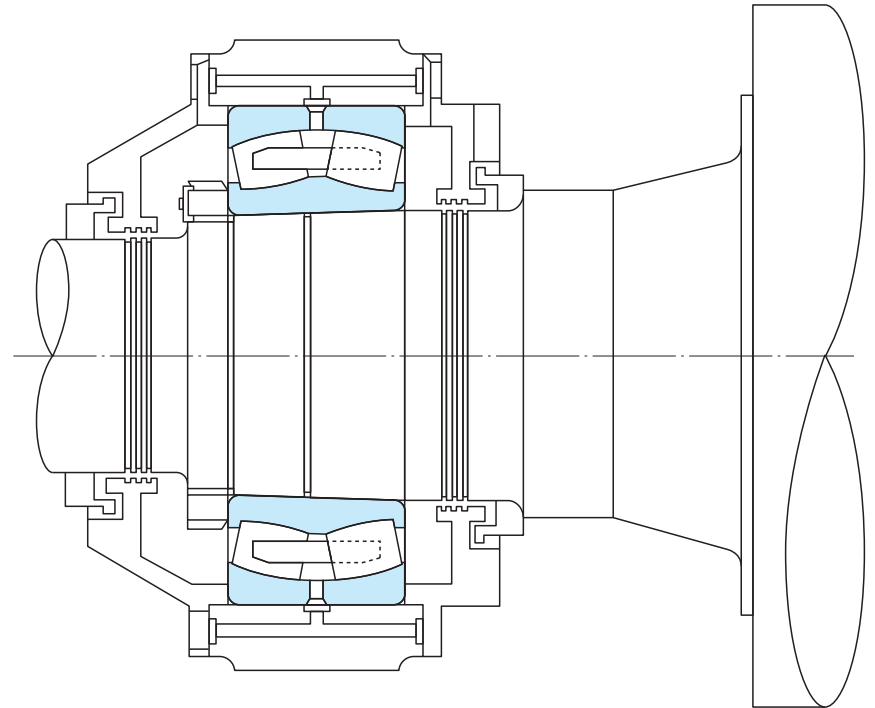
Press Roll, Paper Making Machine (Fixed End)
